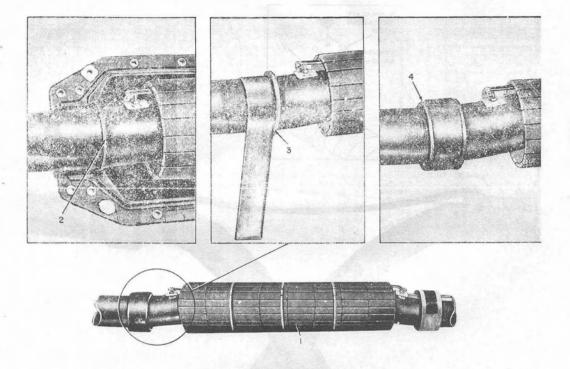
Installation of Closure Using D-180995 Kit of Parts
